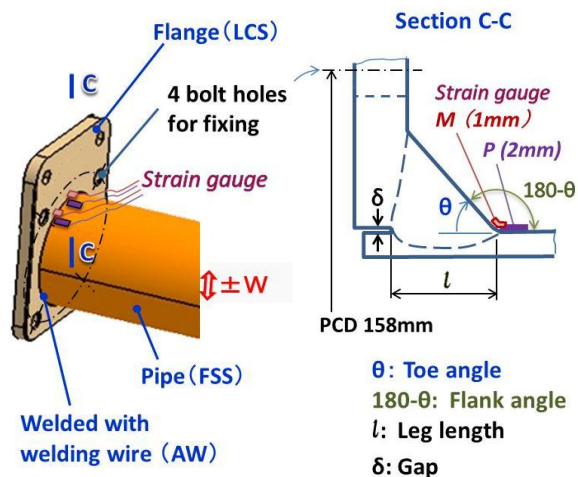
Schematic welded joint and strain gauge position
